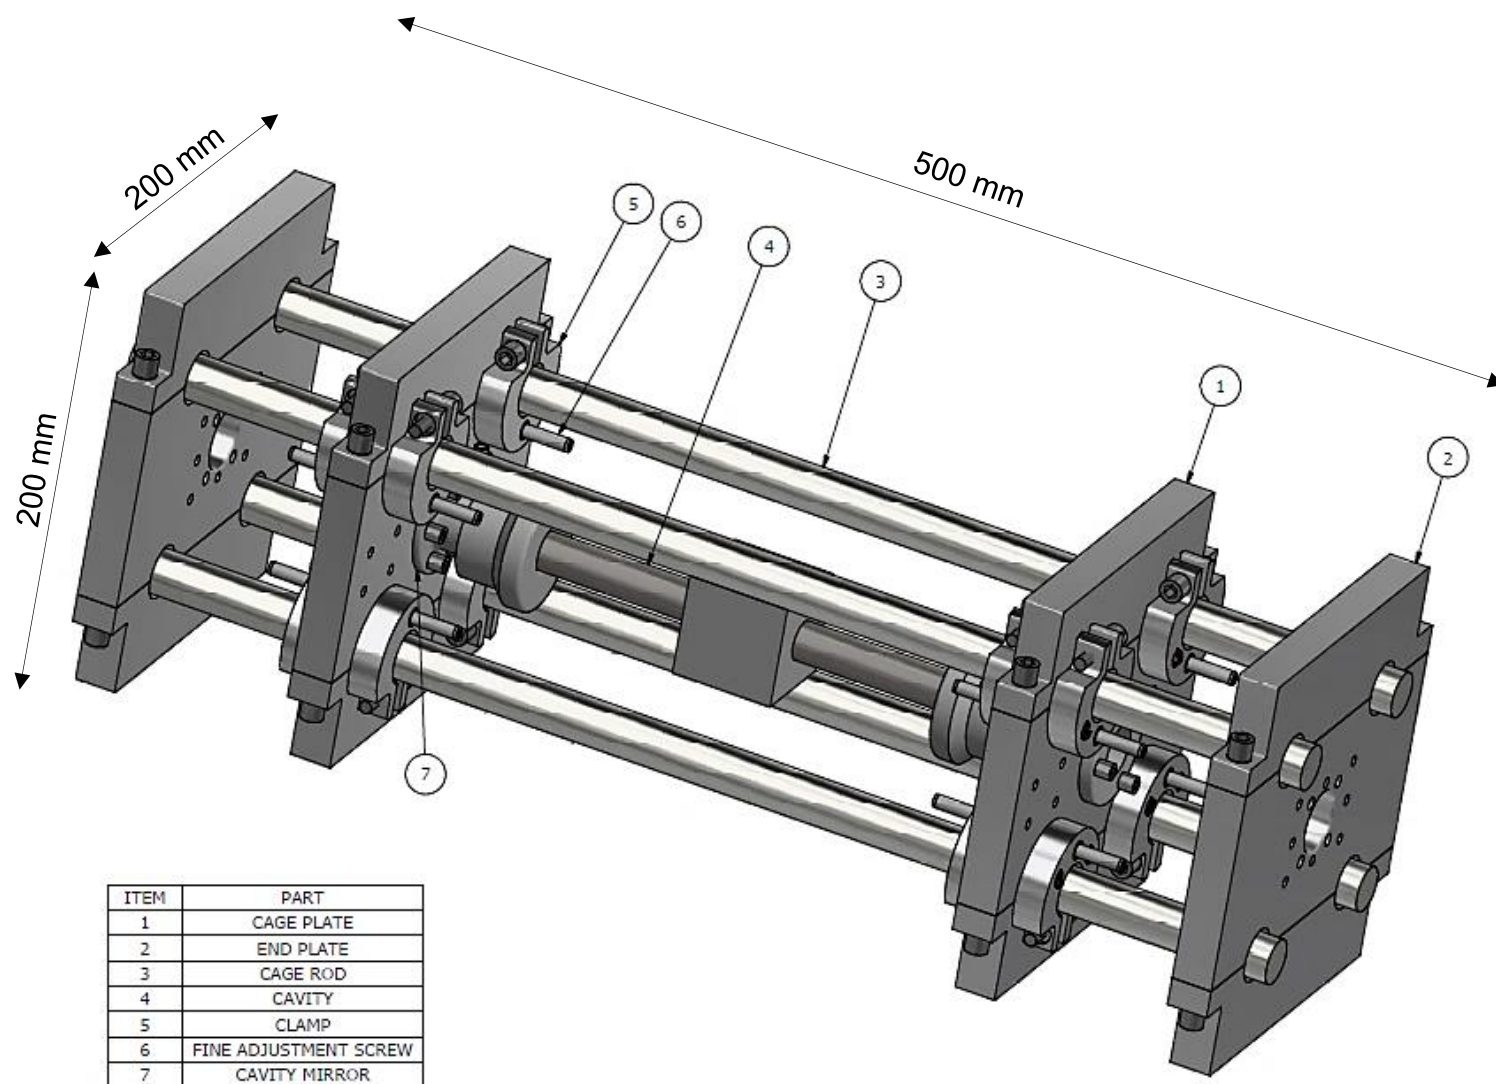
Assembly of the portable set-up showing the cage system made up of invar cage rods and custom-designed aluminium cage plates.
